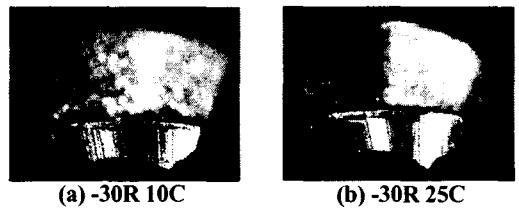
Illustration of Tool Wear in Ball EndMill $\phi 1$ with Different Tool Geometry
